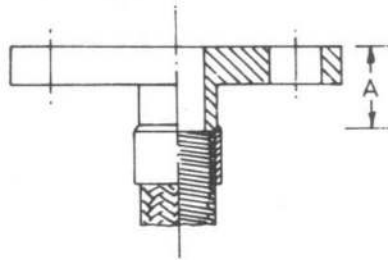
Fixed flange stainless steel welded (FHM)
